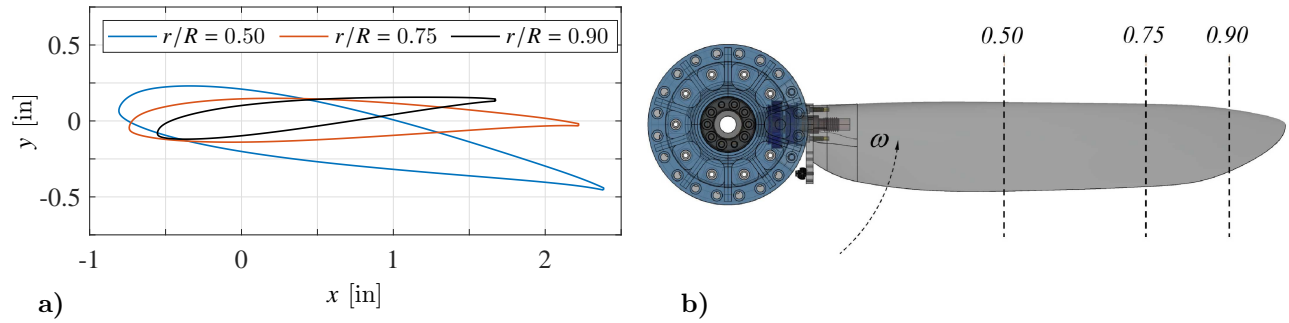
a) Cross sections of the notional eVTOL rotor blade at three radial locations and b) computer aided design drawing of the blade with hub and pitch horn.
